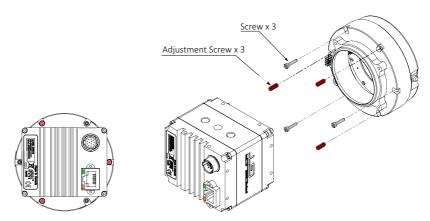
Back view (left) and exploded view (right) of Prosilica GT1930L camera assembly showing the adjustment screws and screws in the EF-Mount
